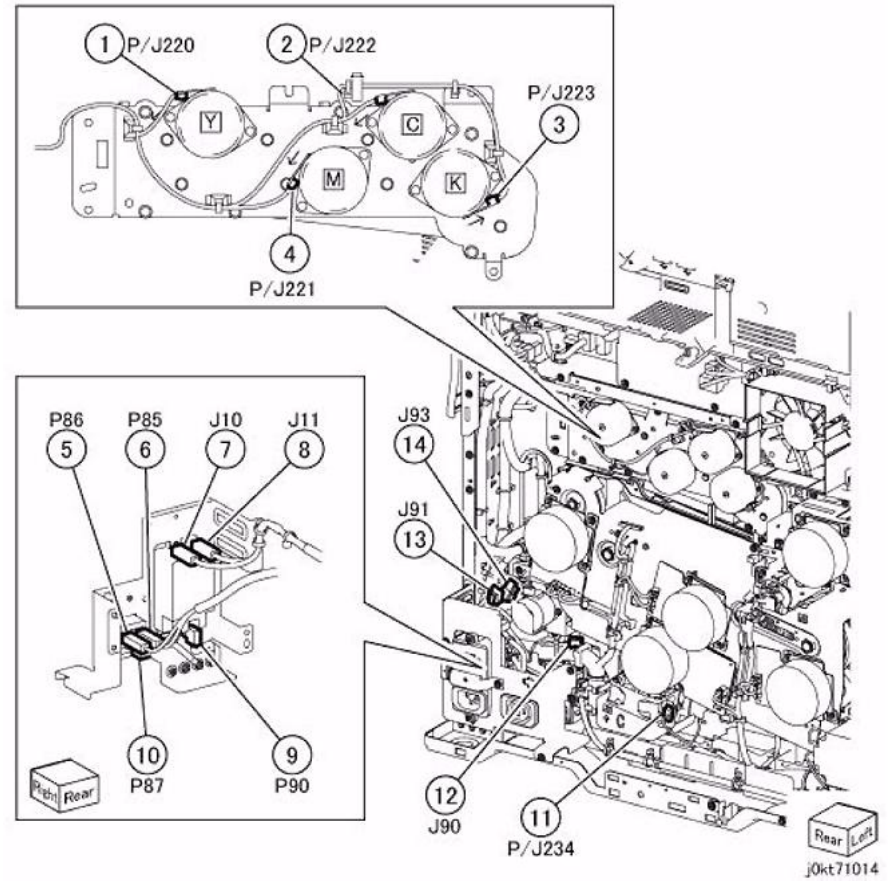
Toner Dispense Motor (Y,M,C,K), GFI Chassis, Bottom Fan
